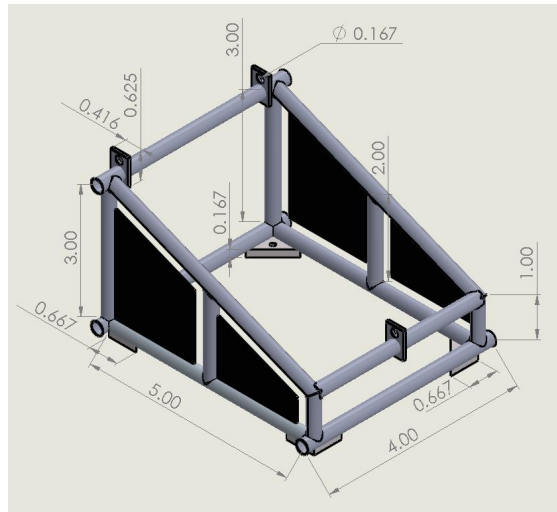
CAD drawing of the final TOV design. This model incorporated the frame, the side panels, and the feet. Dimensions shown are in feet.
